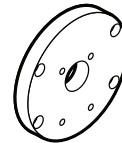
Shows the proper orientation of the movable clamping disk (See #2 in the exploded view below).
